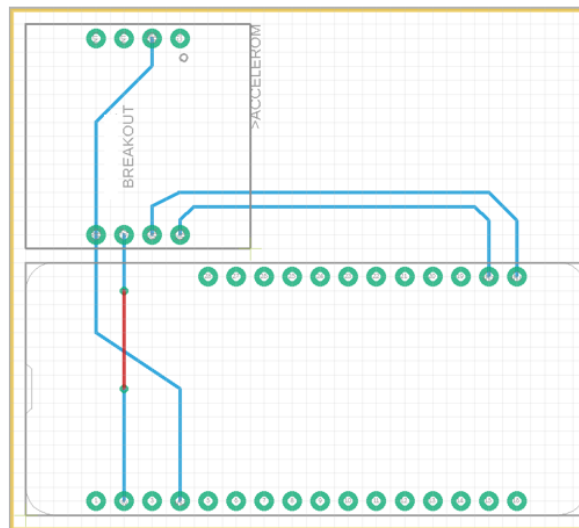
PCB Layout with breakout boards of SoC and accelerometer (I²C wiring)
